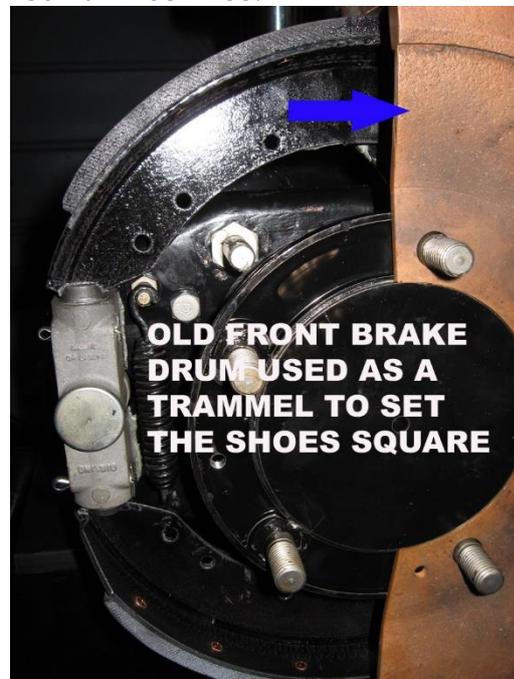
Another view of an old brake drum that has been segmented to allow easy access.
